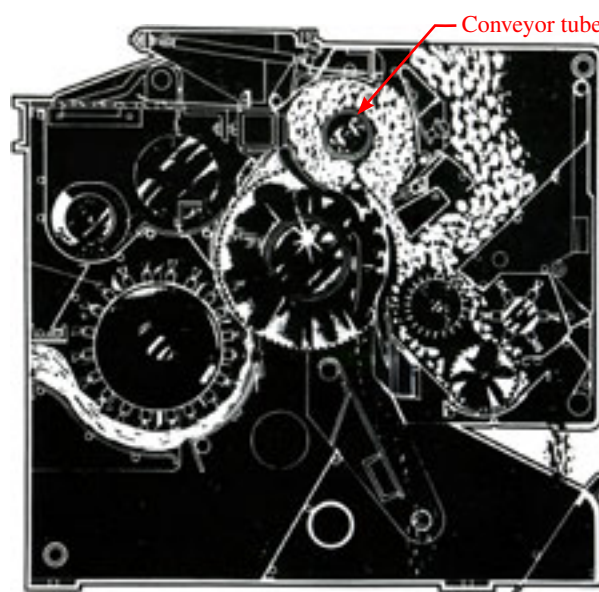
Side view of saw gin stand with conveyor-tube seed roll box (USDA, 1994).
